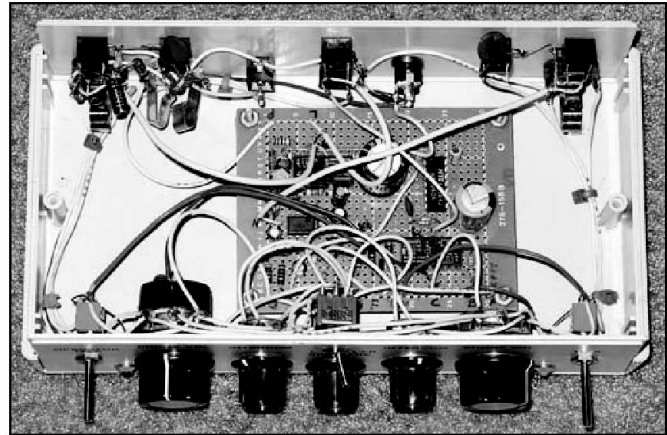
Inside view of the audio interface box. A RadioShack circuit board is used for most components.
